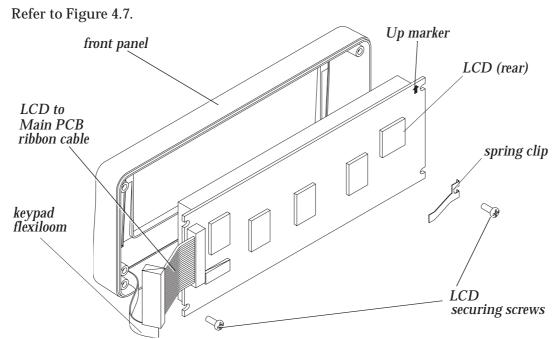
Fitting the LCD to the Front Panel - Internal View of Front Assembly
